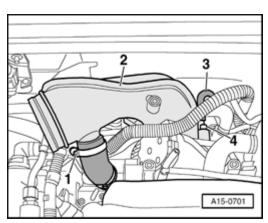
Identifying Throttle Valve Control Module -J338- Electrical Harness Connector & Vacuum Hoses
